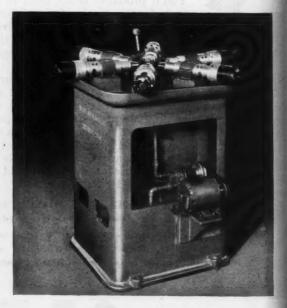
Machine in which Six Simplex Drilling Units are Incorporated
